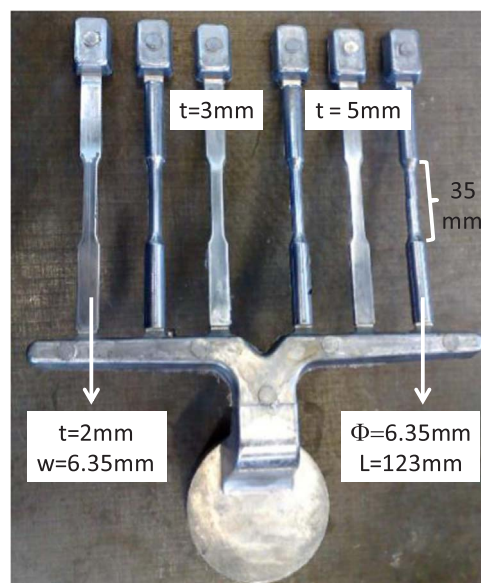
Geometry and dimensions of the high pressure die casting samples used to measure the mechanical properties. Note: 6.35 mm cylindrical and 5 mm flat samples were tested under quasi-static tensile conditions and 2 mm and 3 mm flat specimens were tested to bending.
